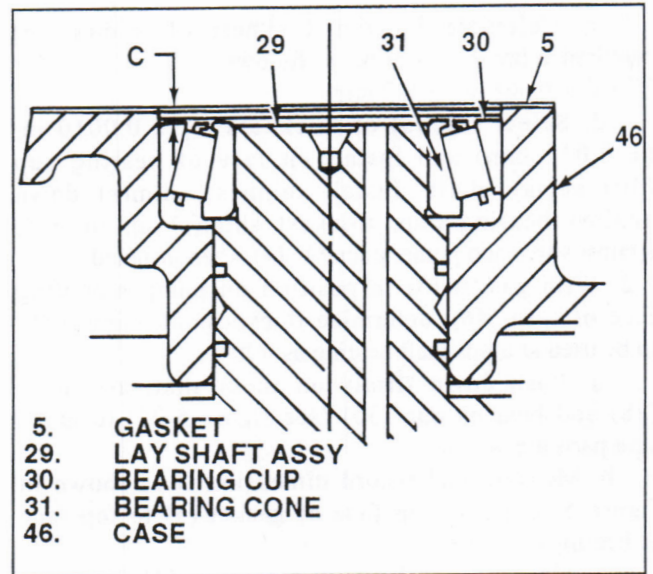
Determining Lay Shaft Bearing Shim Thickness
